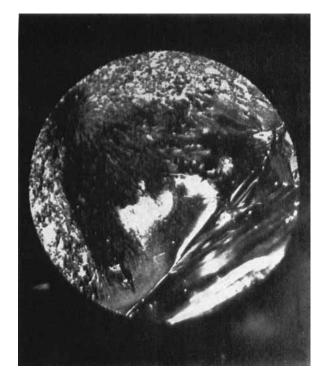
Fracture surface showing fracture origin well inside the surface (×19) $\sigma = 10,000$ psi, f = 4400 cpm
